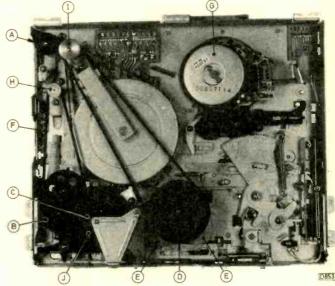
View of the lower deck. Key: A cassette lift drive pulley; B loading gears; C main cam; D spool drive pulley; E forward/rewind spool drive gears; F loading belt; G drum motor; H loading motor pulley; I capstan motor pulley; J mode switch (beneath cam).
